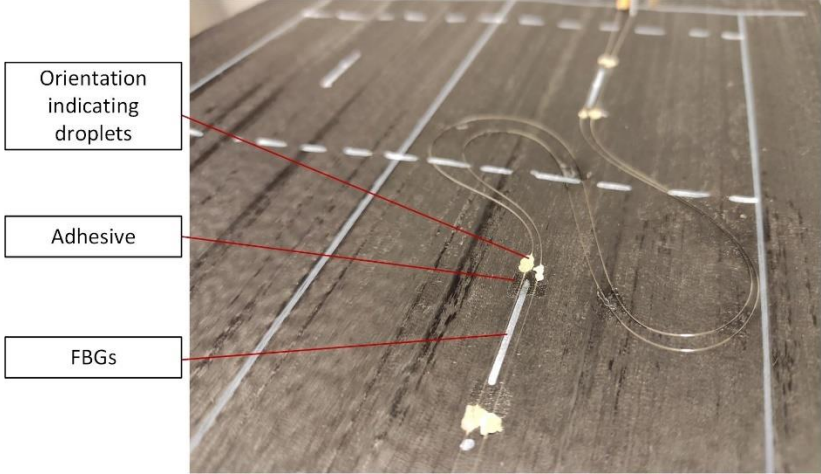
View of FBGs attached to the two bottom layers for the FBG sensors integration.
